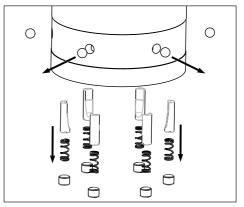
Remove Socket Set Screws, Insert Springs, Taper Inserts and Bearing Balls
